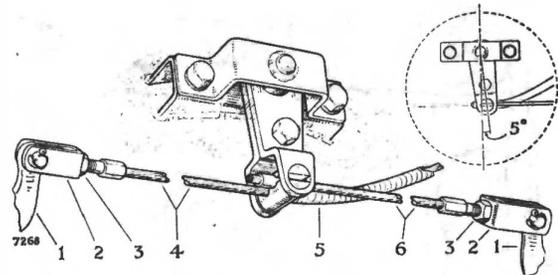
Compensating lever assembly mounted on the rear axle; note the 5° inclination of the compensating lever towards the side having the short cable. Right-hand drive shown, left-hand drive symmetrically opposite
